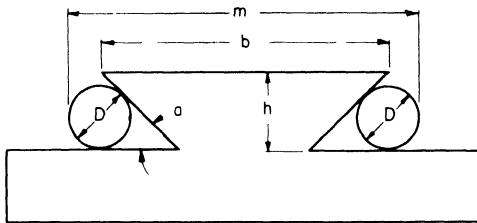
Measuring-roll set-up used to check an external dovetail.
